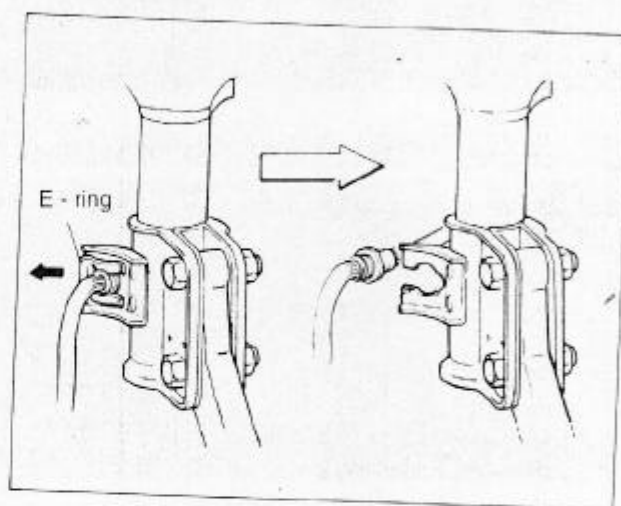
A — 92 DISCONNECTING BRAKE HOSE
